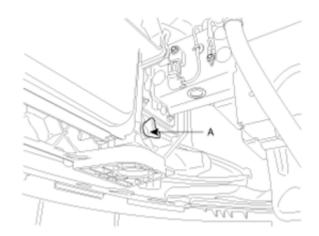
Identifying Drain Plug Courtesy of KIA MOTORS AMERICA, INC.
